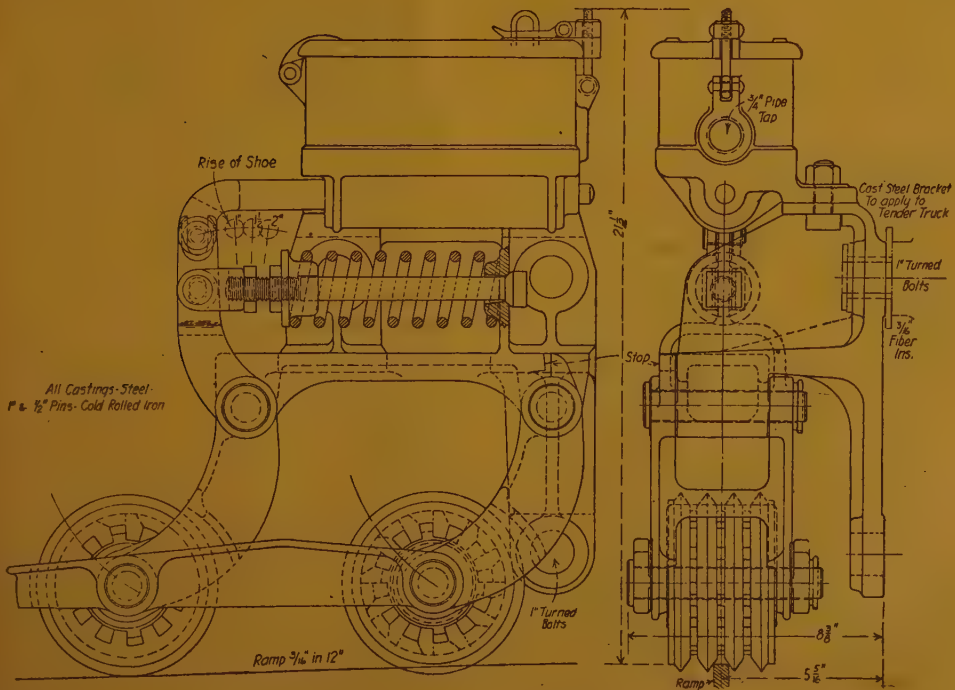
Elevations of contact shoe, type B, showing section through upper plunger and circuit breaker.
